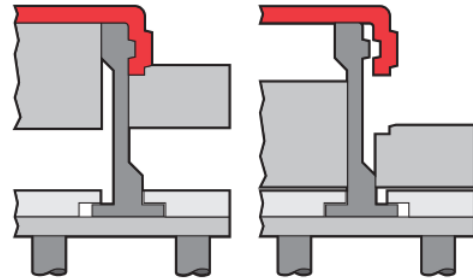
Jiggler Pin (Angled surfaces slide the jiggler pin to clear the undercut during ejection).
